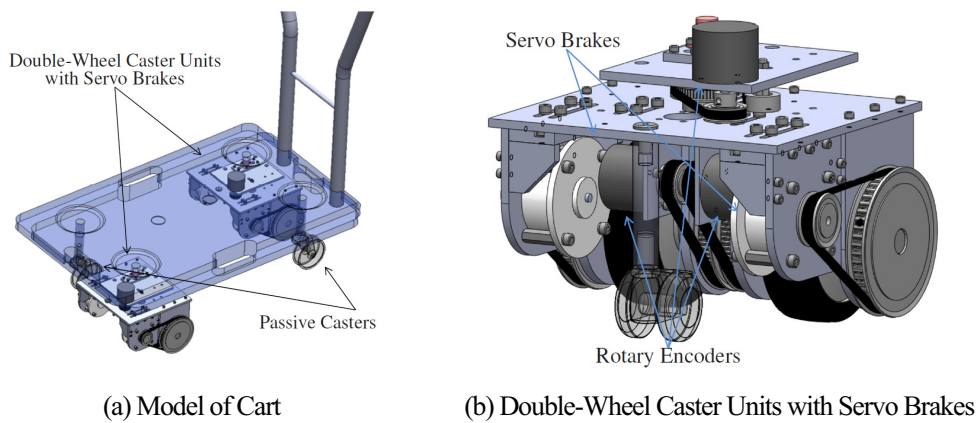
A Mobile Robot Platform using Double-Wheel Caster Units with Servo Brakes
